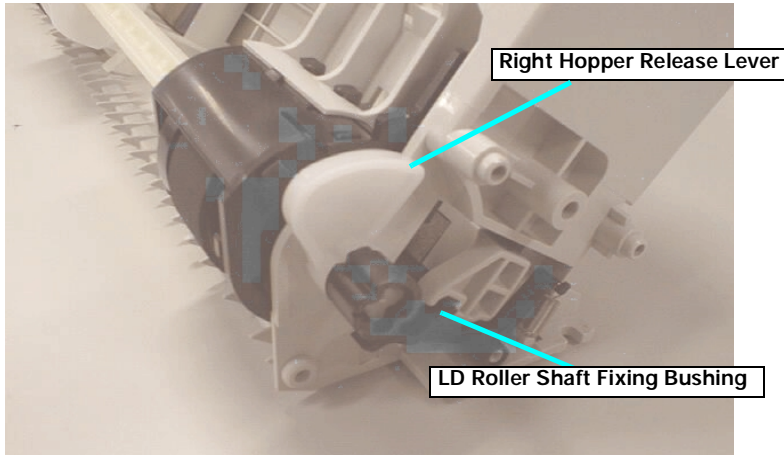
LD Roller Shaft Fixing Bushing Removal
